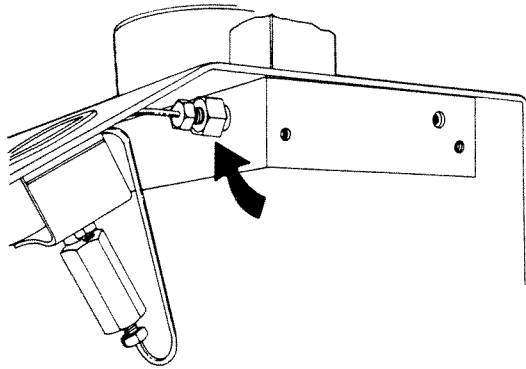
LINEAR ACTUATOR FILTER FITTING (RIGHT END COVER REMOVED)
